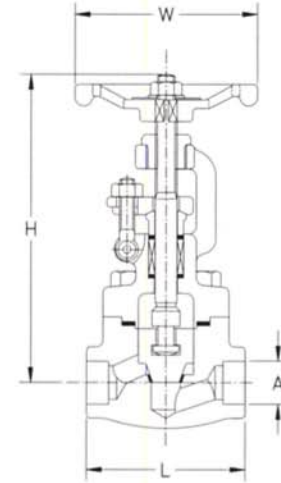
S-FS2 Class 800 (Socket Weld)
